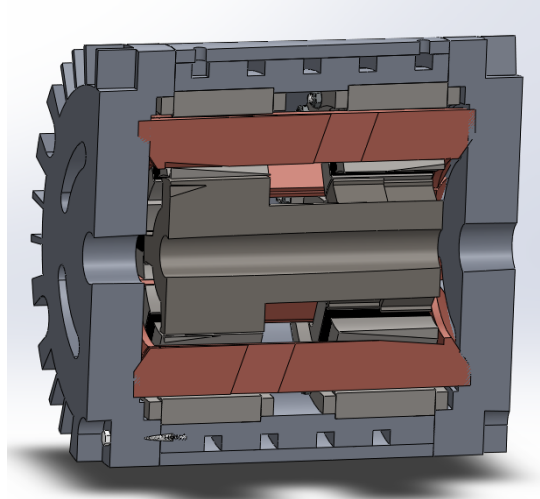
Cut view of the proposed dual-stator 6/4 FSPM machine with water jacket housing. measurement of the rotor and end windings temperature.
